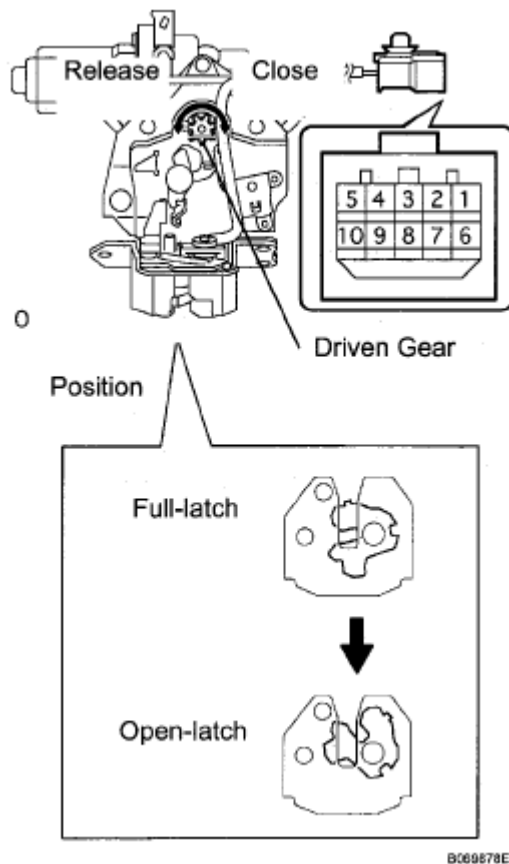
Identifying Back Door Lock Assembly (With Power Back Door System)
